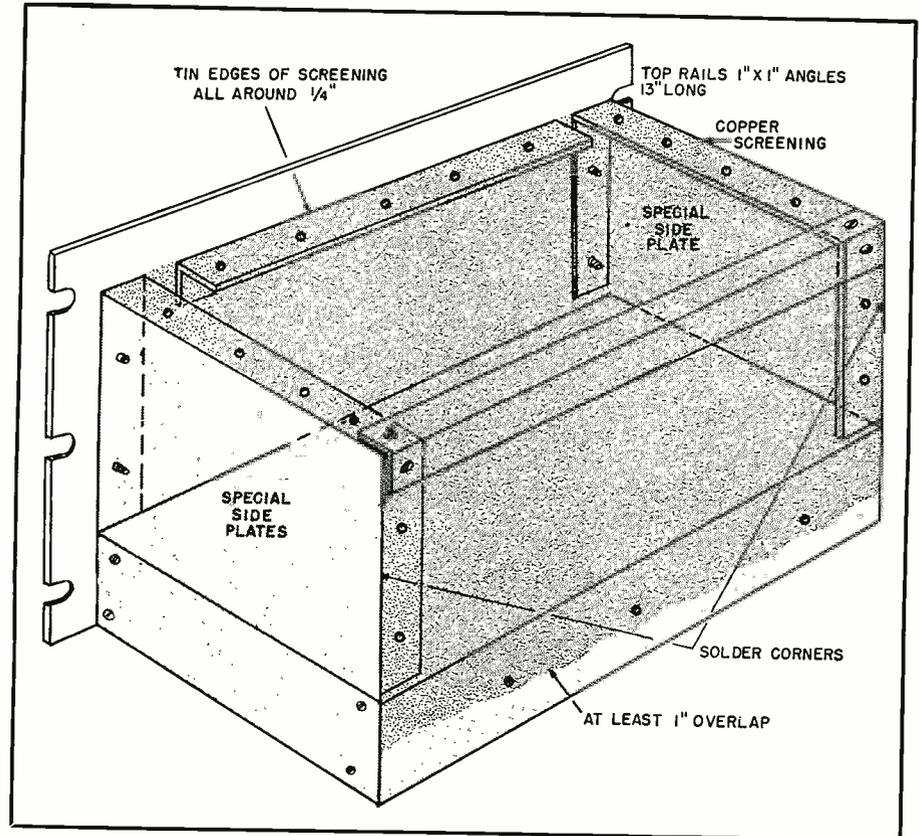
If chassis supporting brackets are not used special side plates made of aluminum can be used. Copper screening would then be necessary only for top and back.
